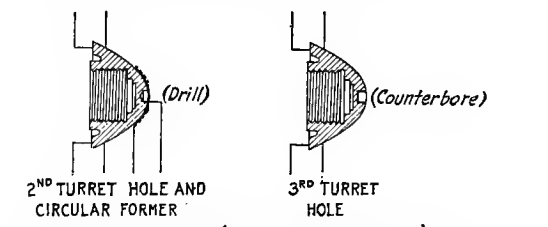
MACHINING A FUSE CAP (MATERIAL, BAR BRASS)
